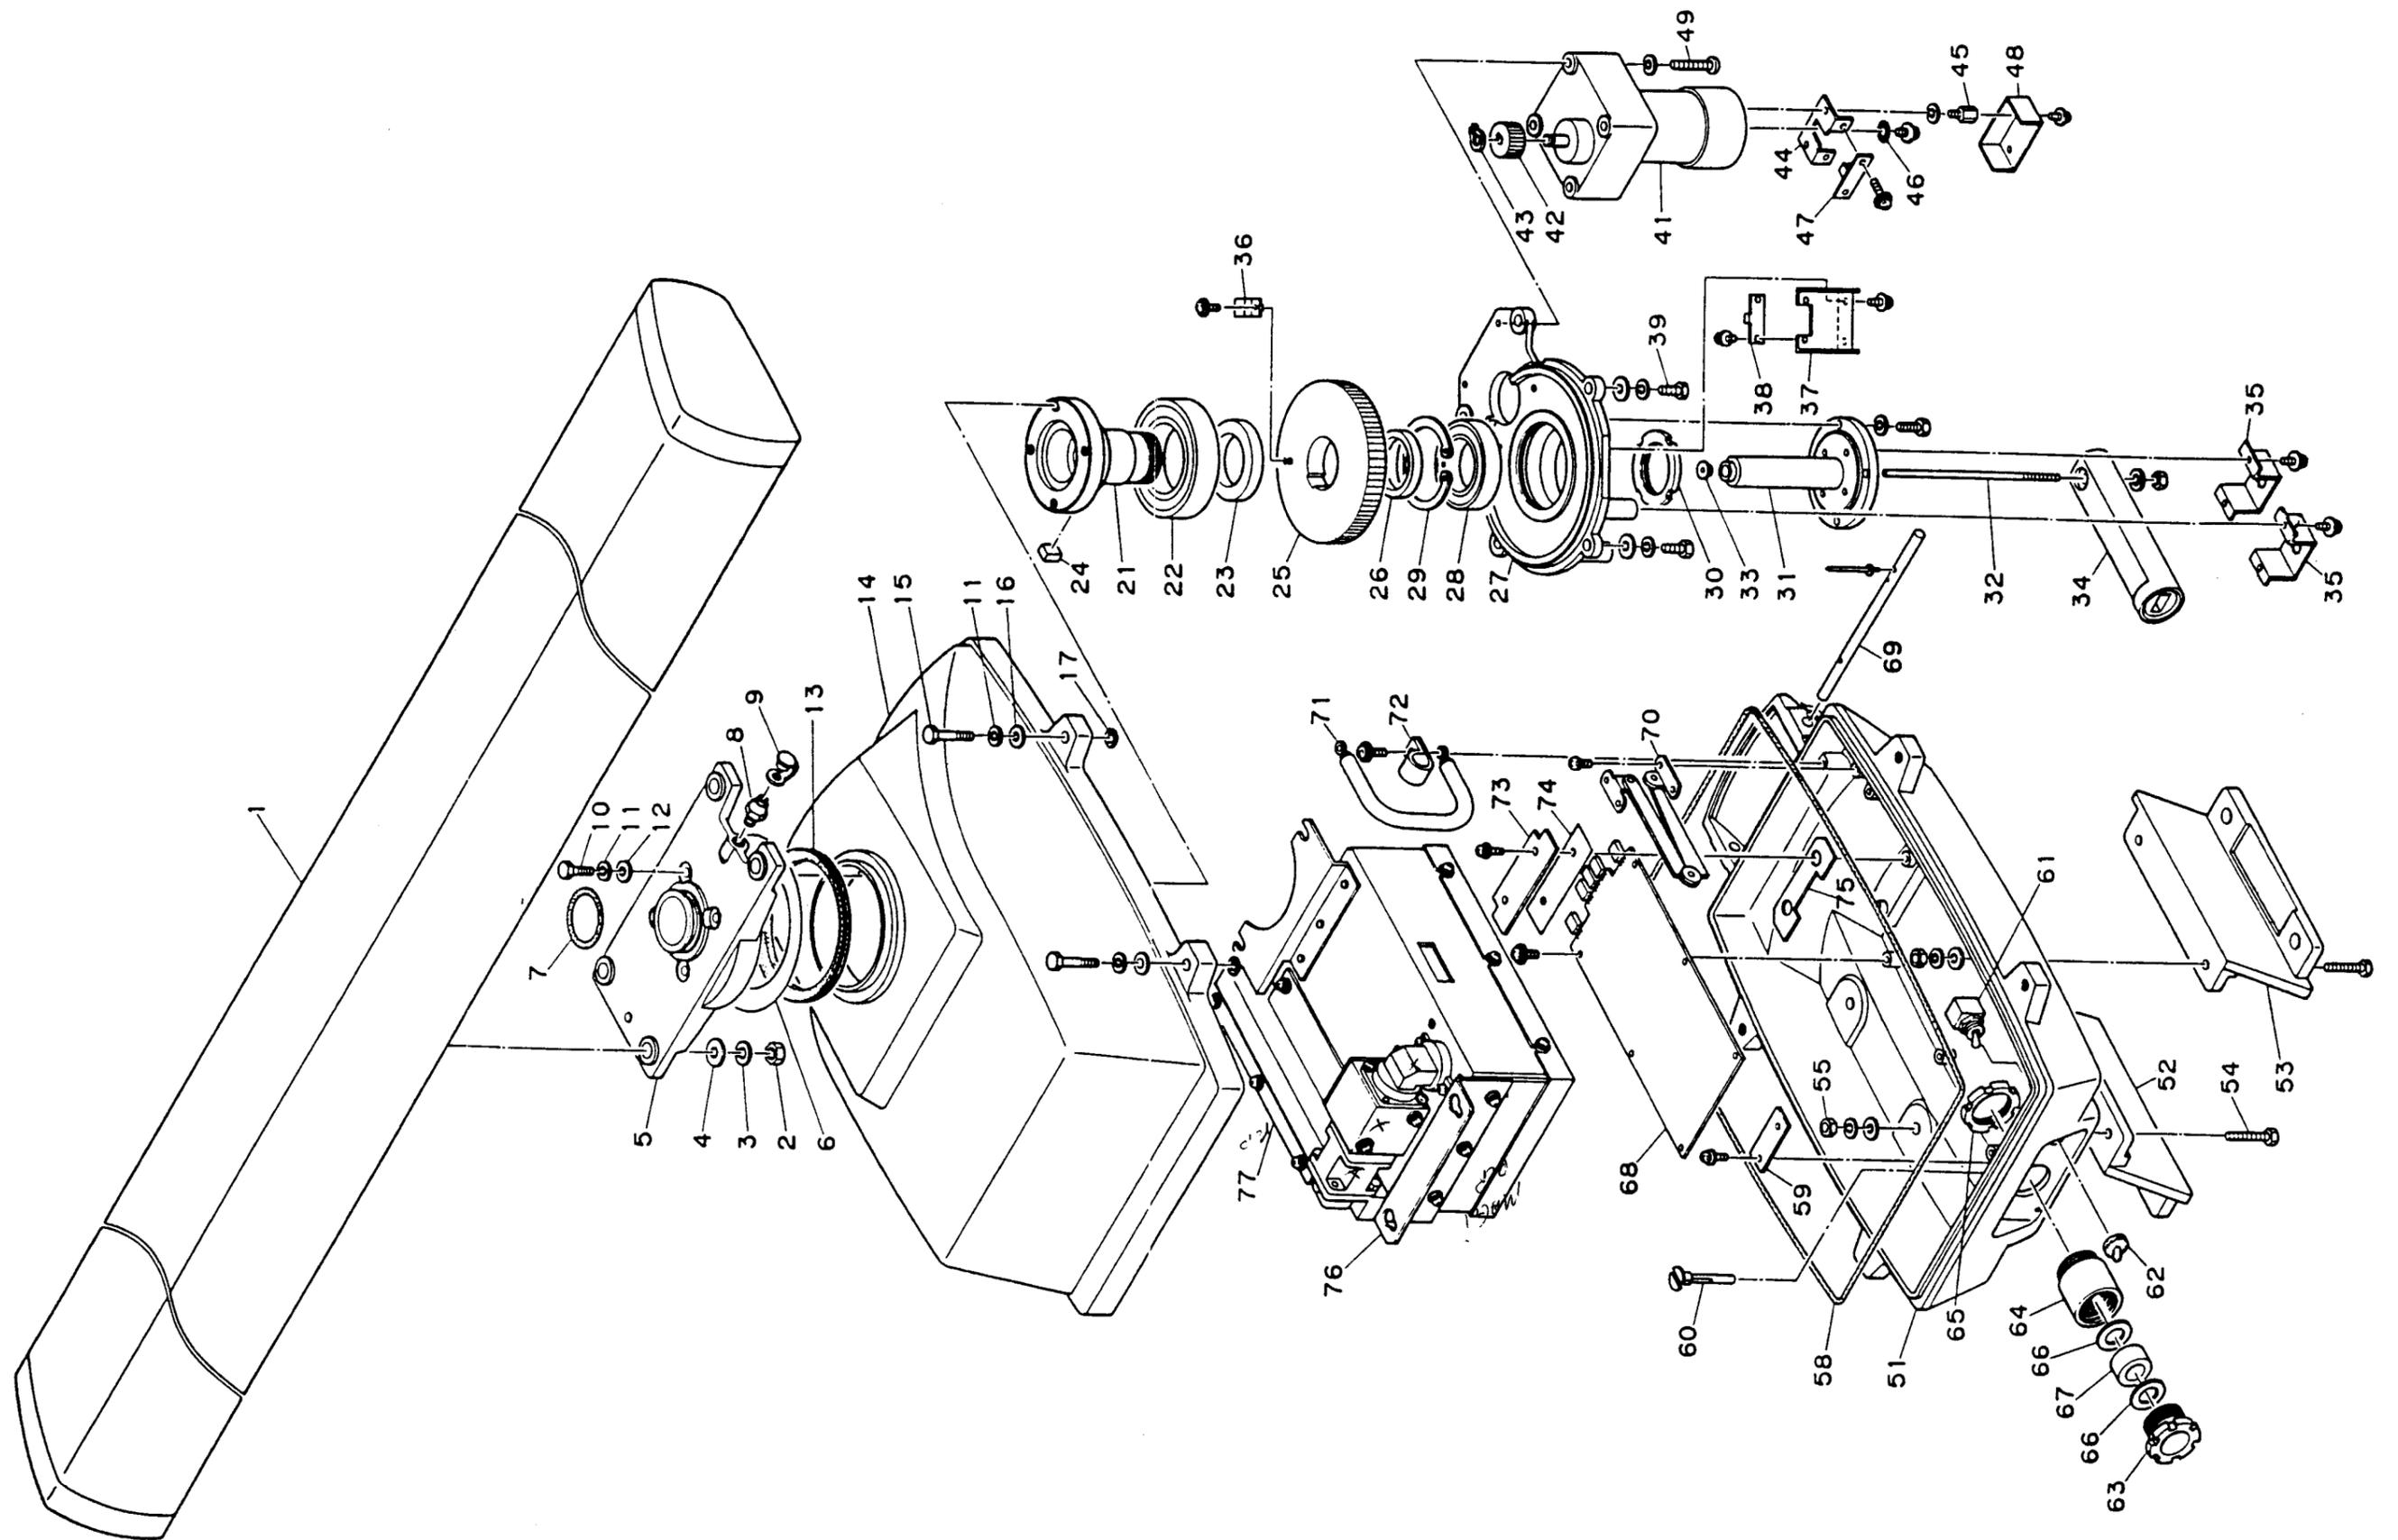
ASSEMBLY DRAWING OF OPEN ARRAY SCANNER UNIT (1/2)
